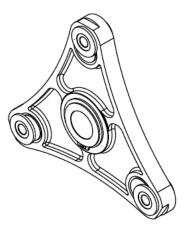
DELTA SUPER 3 COUPLING (ENGINE SIDE)
